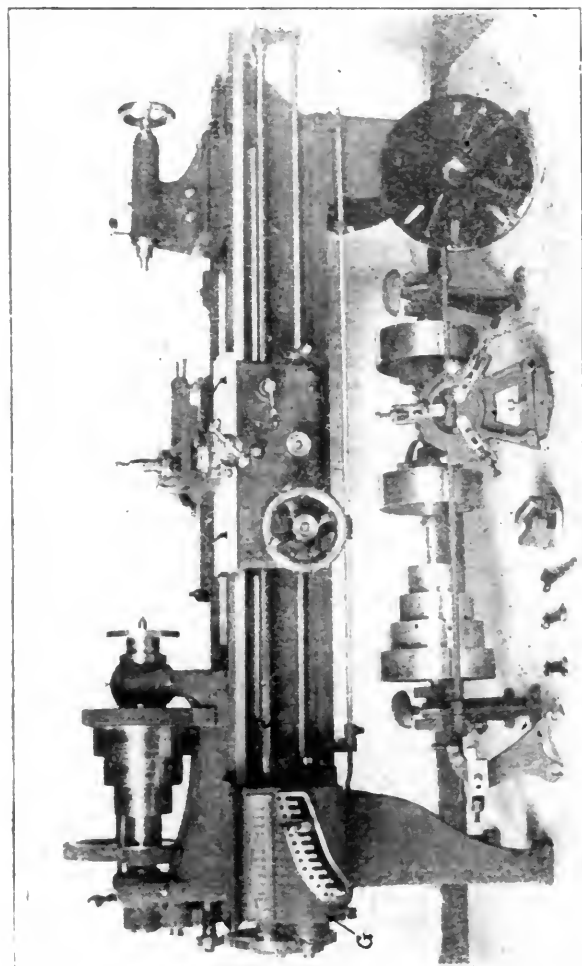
HENDY-NORTON ENGINE LATHE, SHOWING ARRANGEMENT OF GEAR-BOX.
